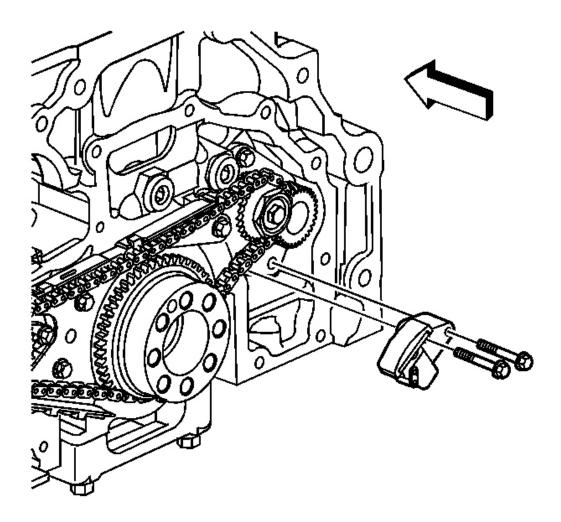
View Of Balance Shaft Chain Tensioner Courtesy of GENERAL MOTORS CORP.
